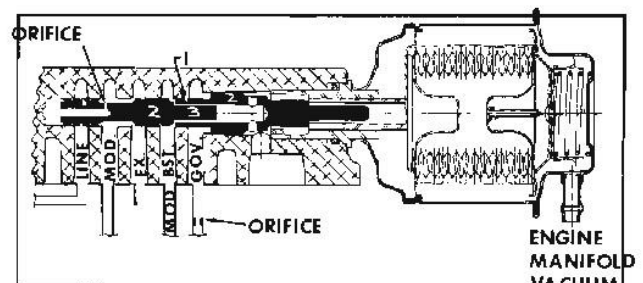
B-10 Vacuum Modulator and Valve Assembly
